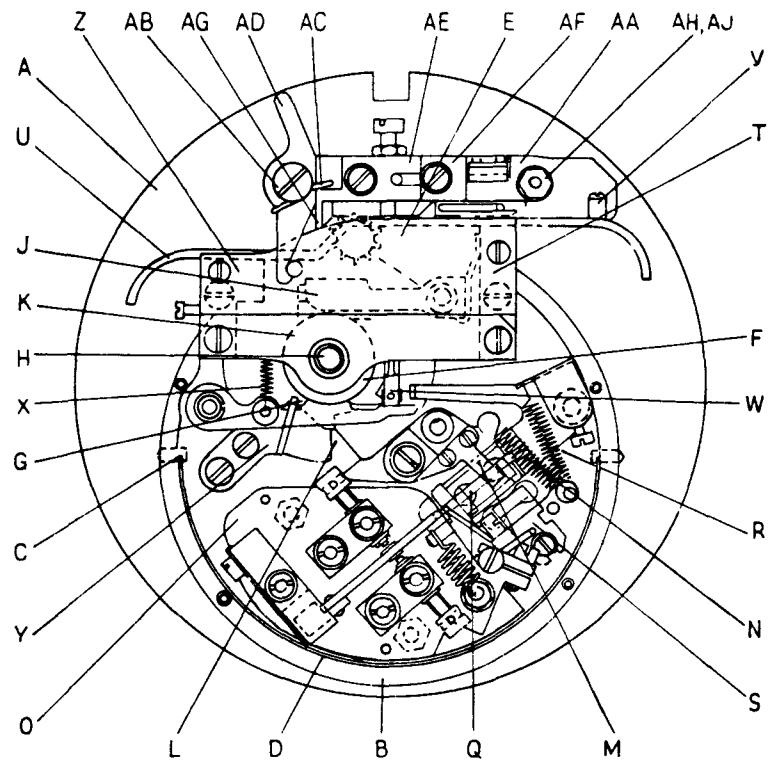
TRANSMITTER HEAD C.P. (FRONT VIEW)
